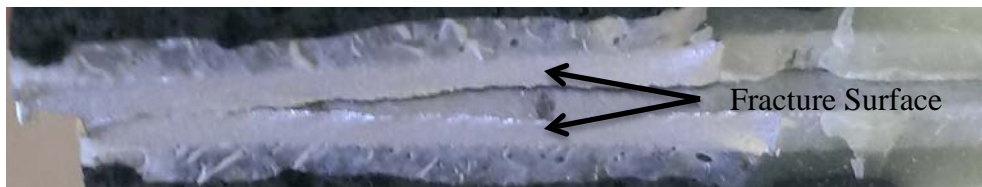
Cracked edge of sample 2 showing brittle fracture surface
